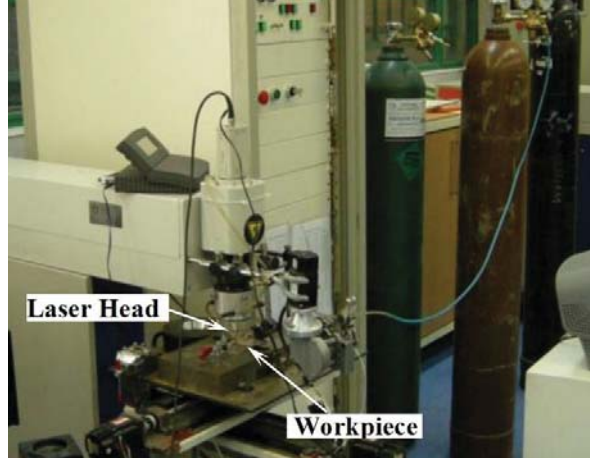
Pulsed laser welding set up used in the experiments.
